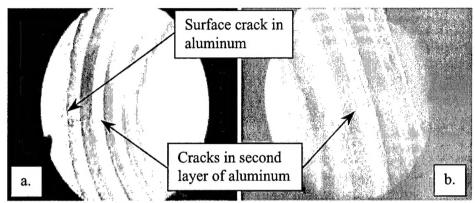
Subsurface cracking through the second layer in specimen at 80 kcycles. Figure-a shows the left side of the hole. Figure-b shows the right.
